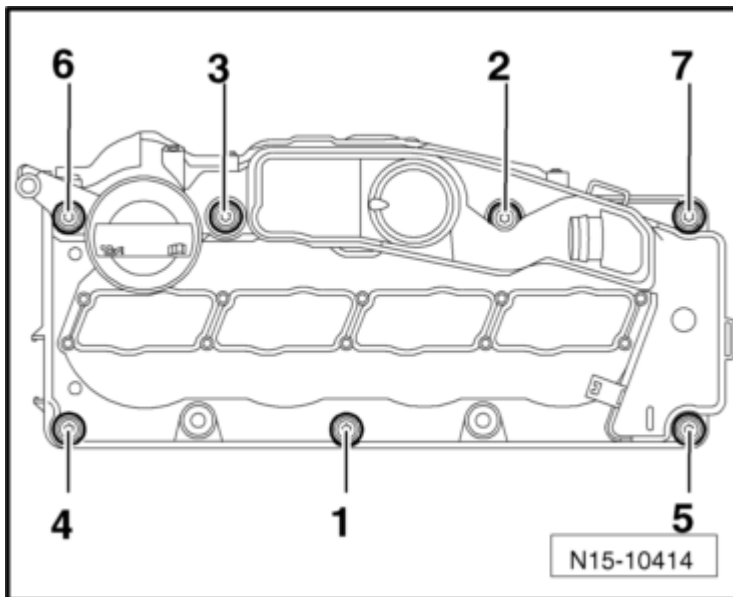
Identifying Head Cover Bolts -1 Through 7- Tightening Sequence
